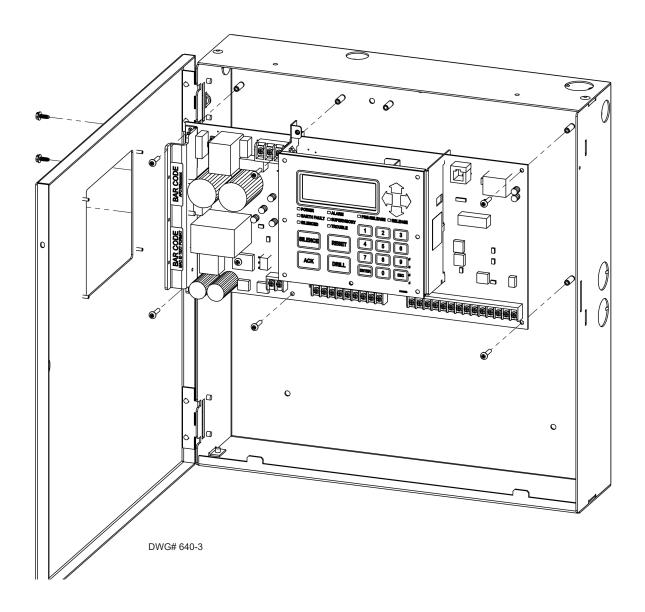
ARC-100 Cabinet Showing Circuit Board Assembly
